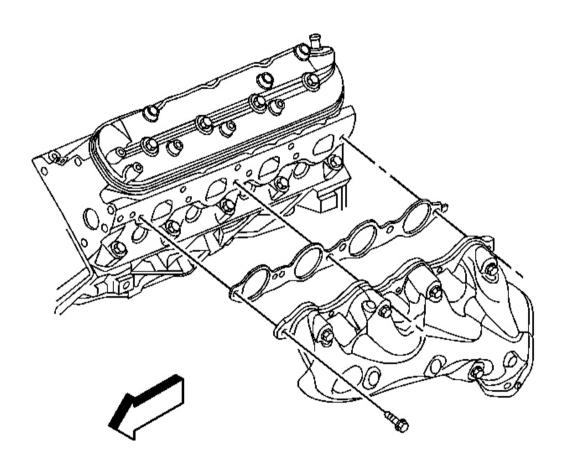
View Of Exhaust Manifold, Manifold Bolts & Gasket Courtesy of GENERAL MOTORS CORP.
